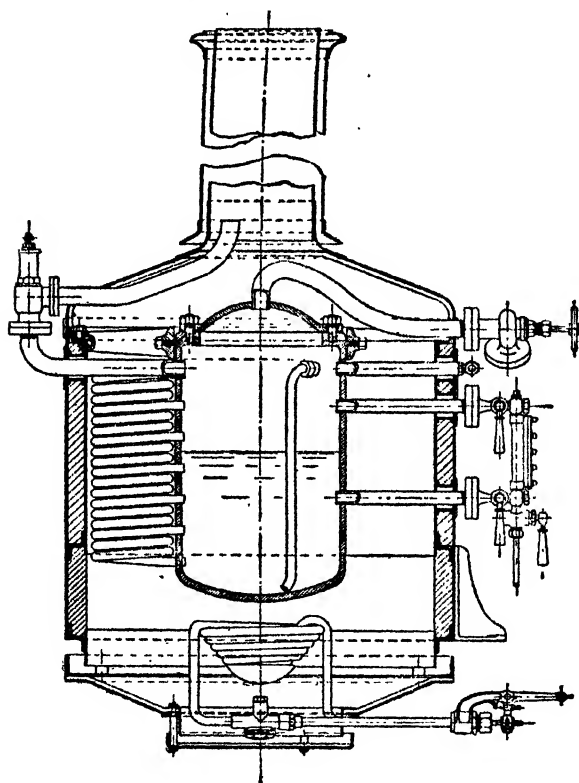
Section of Lune Valley water-tube boiler showing arrangement of paraffin burner.
